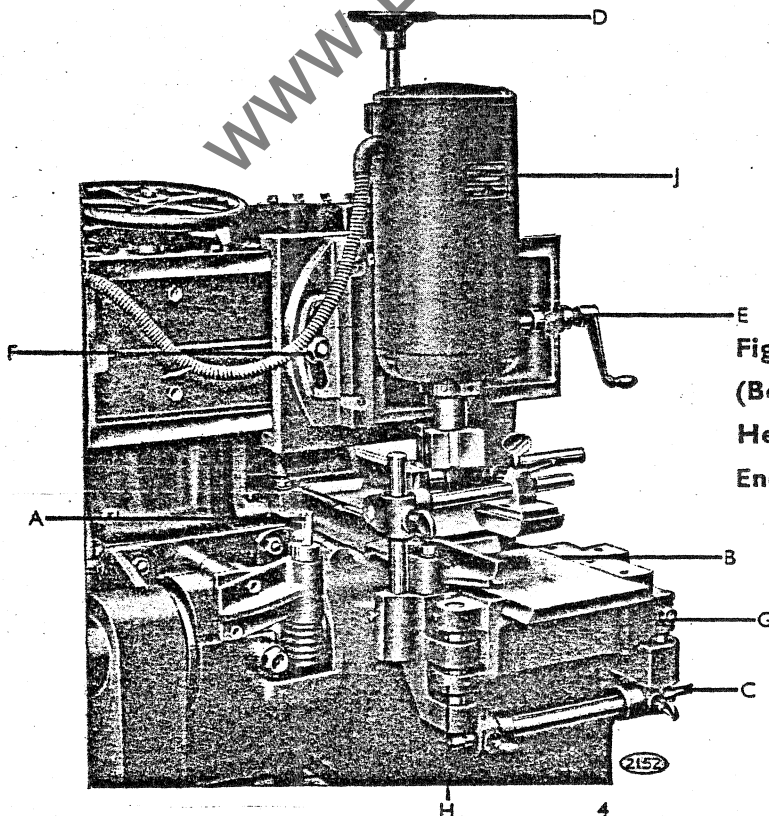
Additional Bottom (Beading) Head and Throating Head, mounted at Feed-out End of the Machine.
